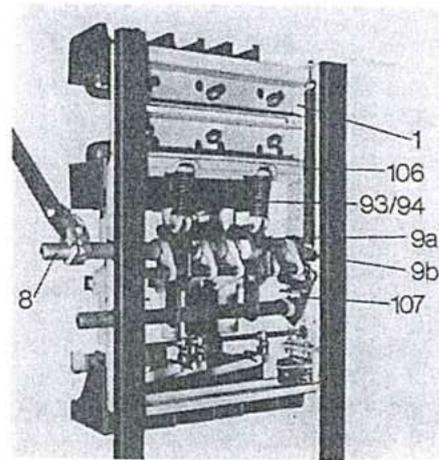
A: Switch mechanism in waiting position. Closing springs charged and latched. Opening springs charged, trip mechanism latched.
